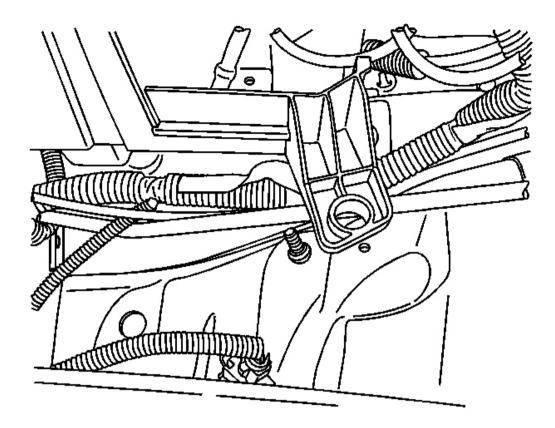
Liquid Line, Nut & TXV Courtesy of GENERAL MOTORS CORP.
